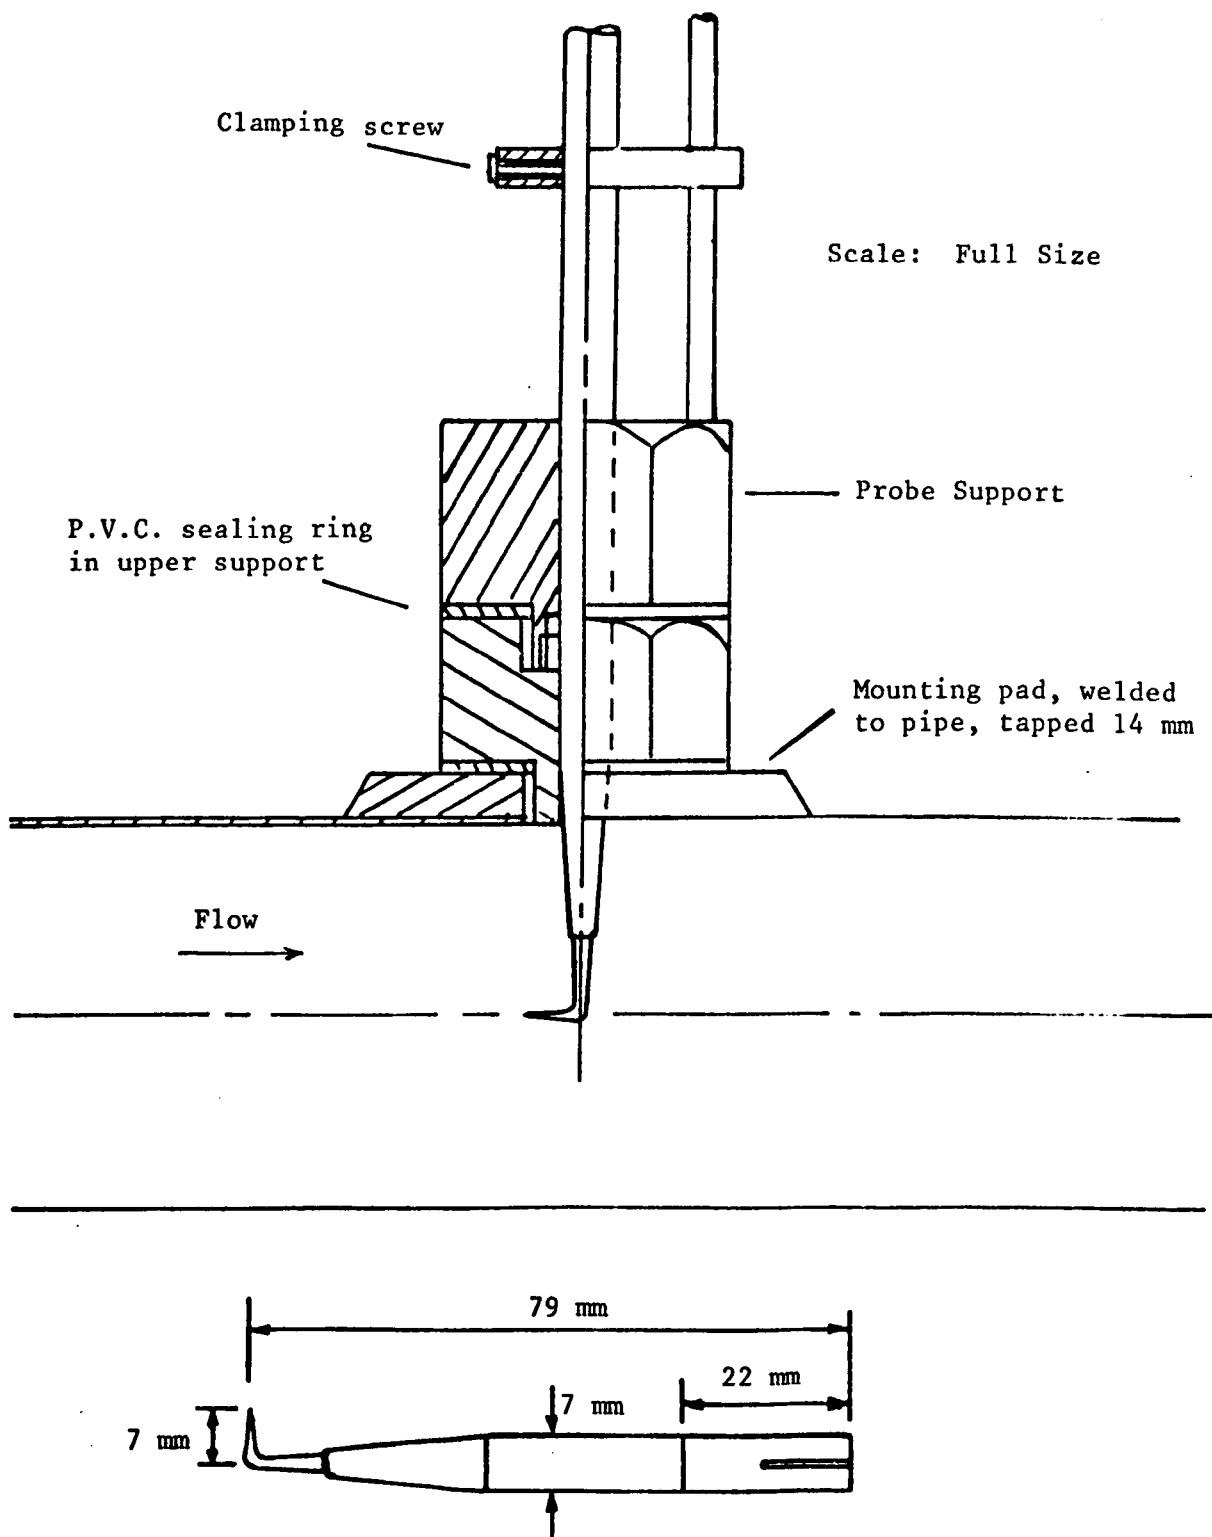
DISA 55A82 hot film probe and support mounted on the pipeline.
